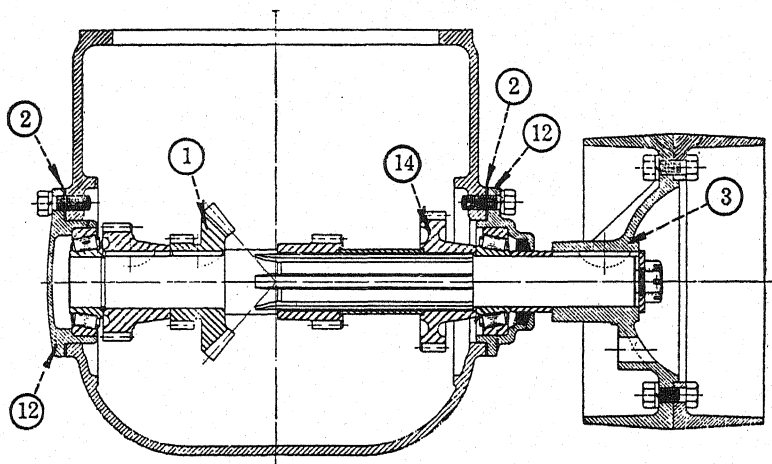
Adjusting bearings of belt-pulley shaft by removing shims.
